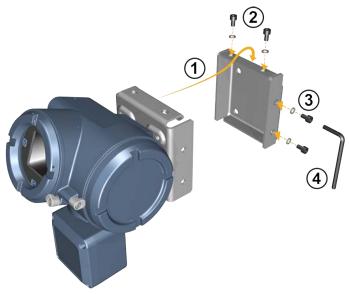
Pole-mounting bracket attachment for a painted aluminum transmitter
